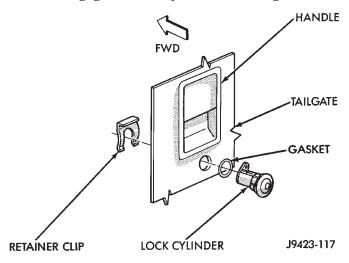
Tailgate Lock Cylinder Removal/Installation the latch-to-lock cylinder rod.
